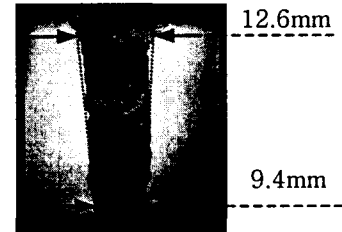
Transverse Cross Section for Narrow-gap TIG Welding (t35mm)
